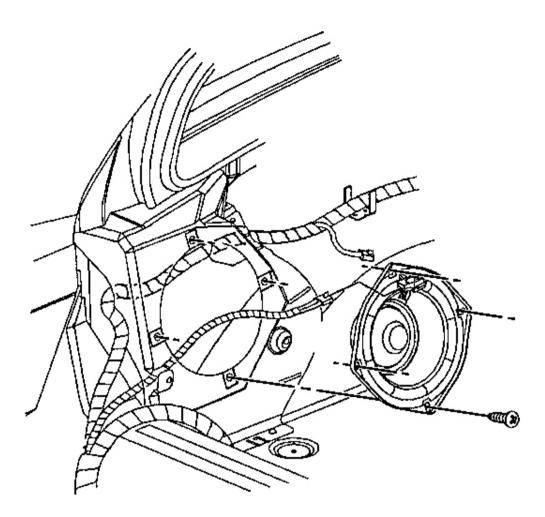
Electrical/Audio Connector At Rear Speaker Courtesy of GENERAL MOTORS CORP.
